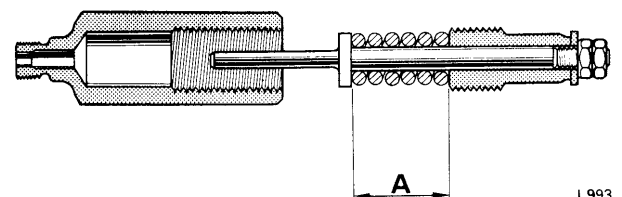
CHECKING THE FRONT BAND ADJUSTING TOOL
